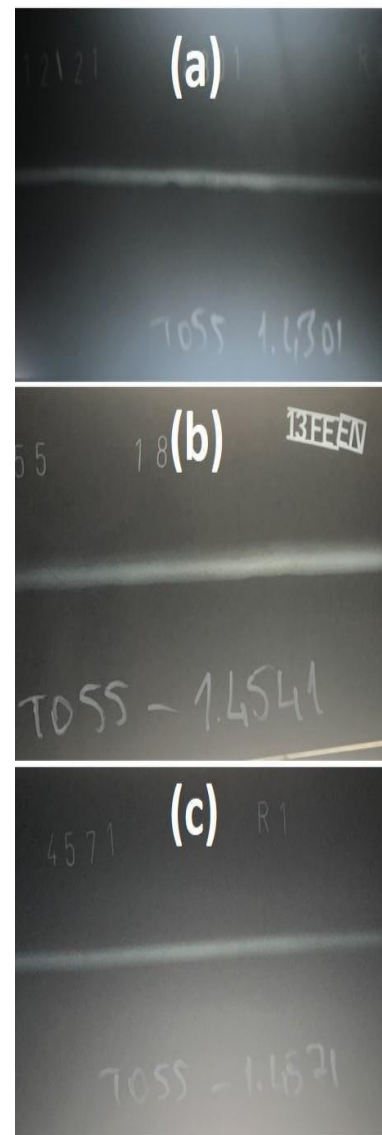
Radiographic inspection of seam welds of stainless steels: (a) 304, (b) 321 ve (c) 316Ti
